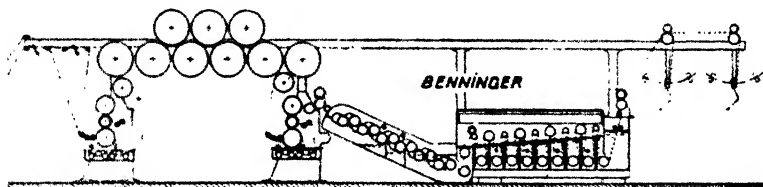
Descriptive drawing of Benninger chainless mercerising machine, type O.M.
